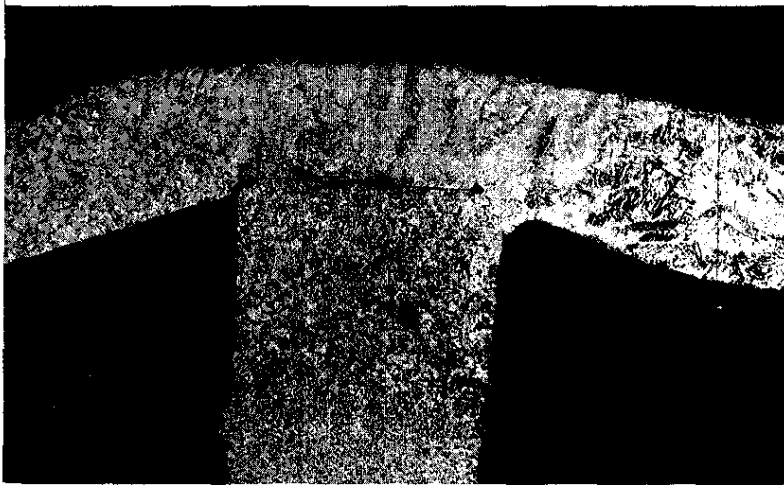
ZIRCALLOY SHEATH WITH WELDED RIBS BEFORE  $\text{UO}_2$  LOADING AND SWAGING 1.840-in. ID  $\times$  0.022-in. wall; 0.060-in. -wide ribs
